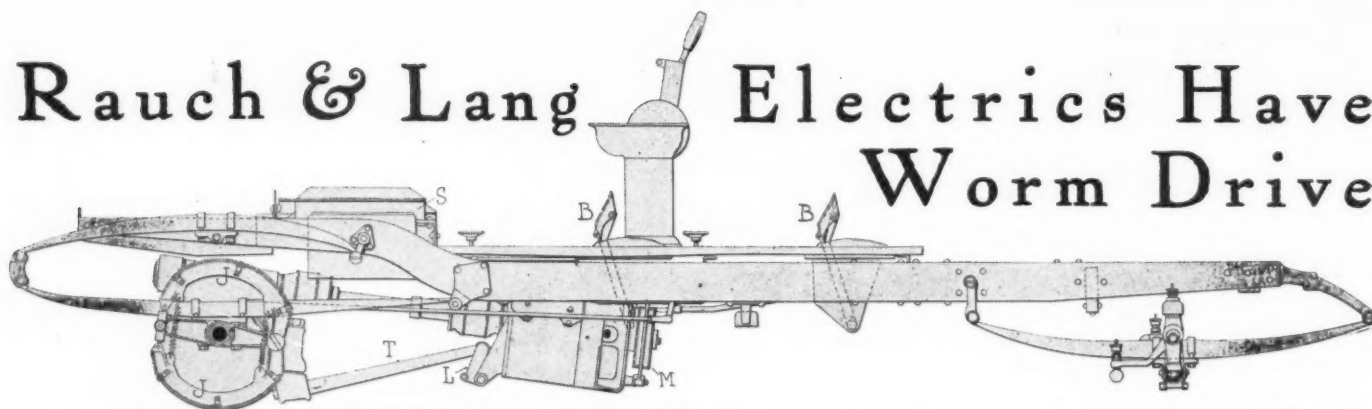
Schematic side view of the Rauch & Lang chassis, showing mounting of the motor. B and B are the interconnected brake pedals; S is the controller; T is the torsion tube attached to the motor by the toggle joint T; J and J are the brake bands
